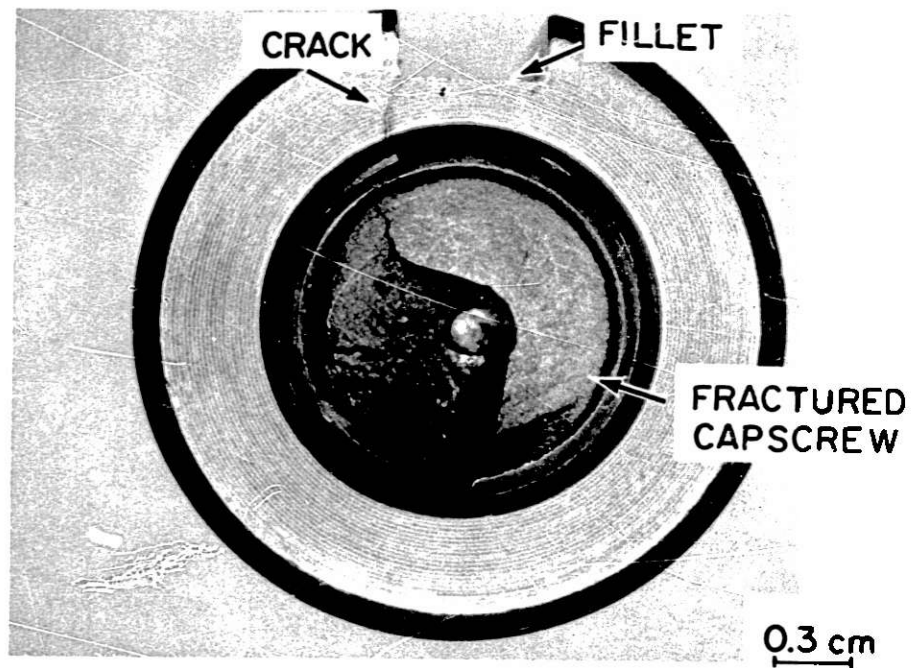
Cross Section of Synthane Pump Impeller Shaft Showing the Keyway Fillet Radius, Crack, and Fractured Capscrew. ANL Neg. No. 306-77-402.
